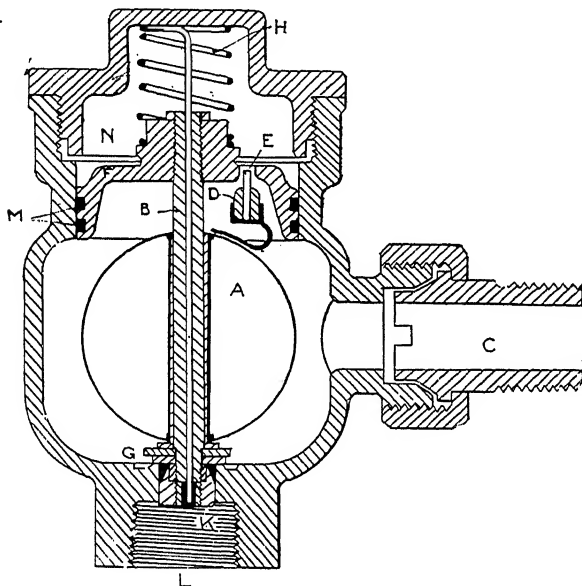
Motor Relief Valve of the Atmospheric Steam Heating Co.
